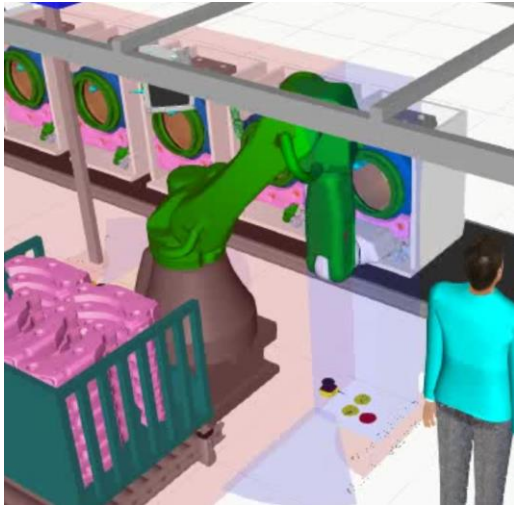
The robot is busy positioning the counterweight on the moving washing machine; once finished the operator fixates the counterweight after which the robot returns to pick up the next
